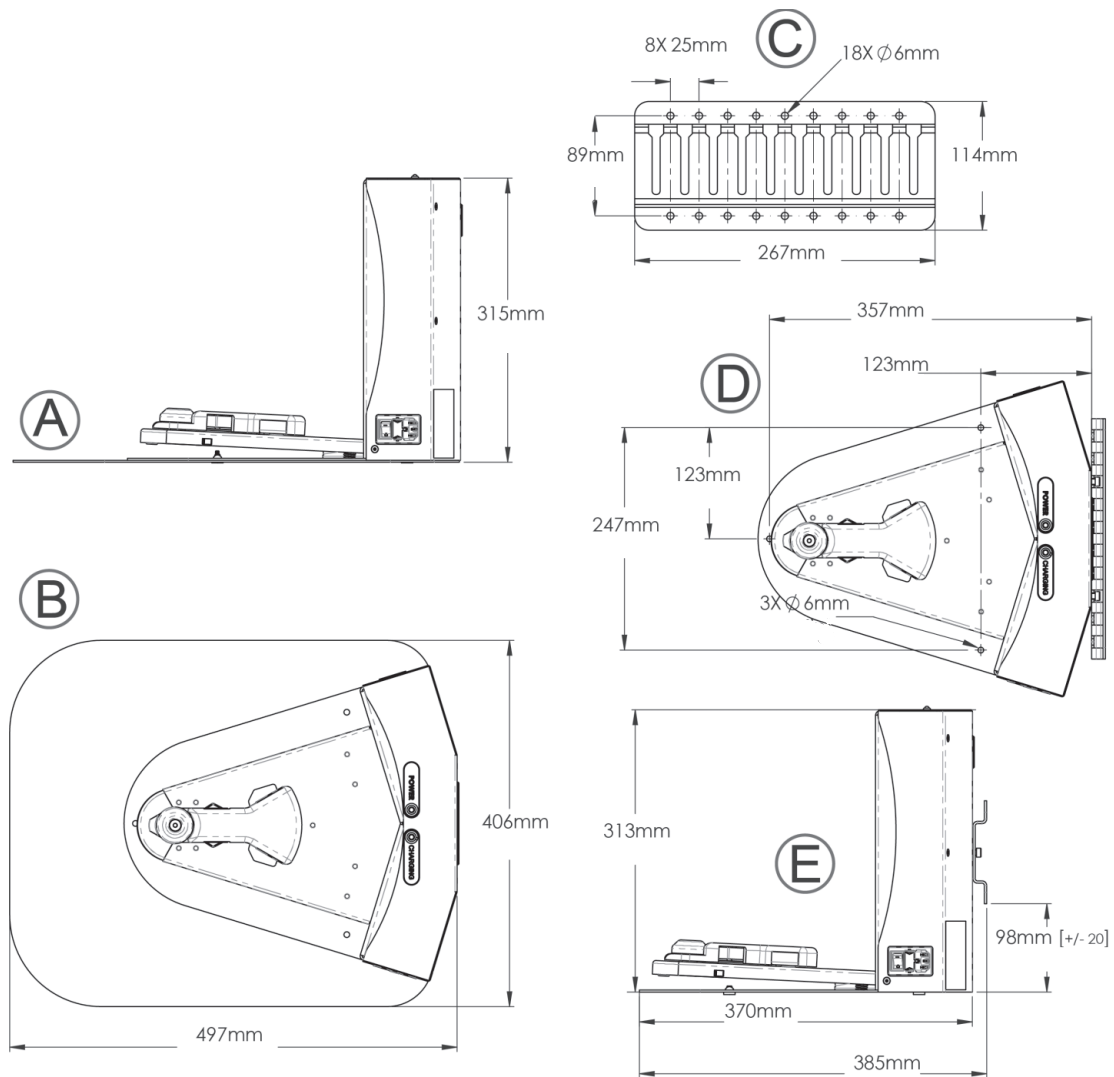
Docking Station Dimensions for, (A) Wall/Floor Mounts, (B) Free Standing, and (C) Wall Mount Bracket (units are in mm)
